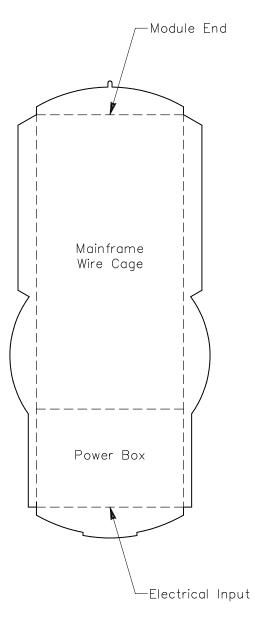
CRAY C98 and CRAY D98 Subassemblies
